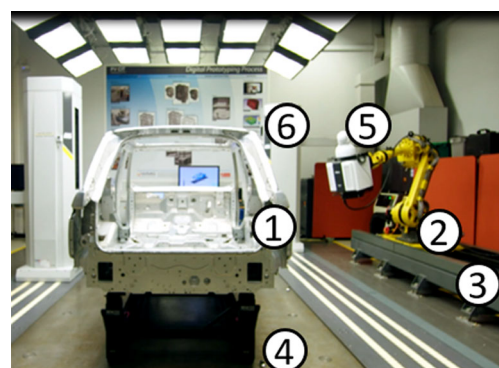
Experimental set-up (labels: 1 workpiece, 2 robot, 3 trail, 4 tooling balls, 5 LR, 6 CMM)
